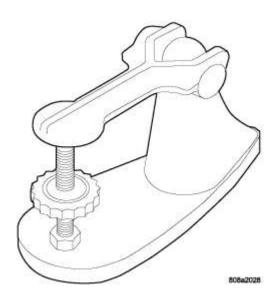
Valve Spring Tester C-647 Courtesy of CHRYSLER LLC
